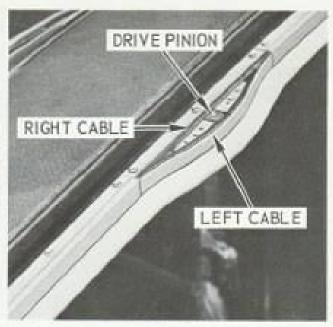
Rear Slide and Cable Assallation on Side Guide Rail
